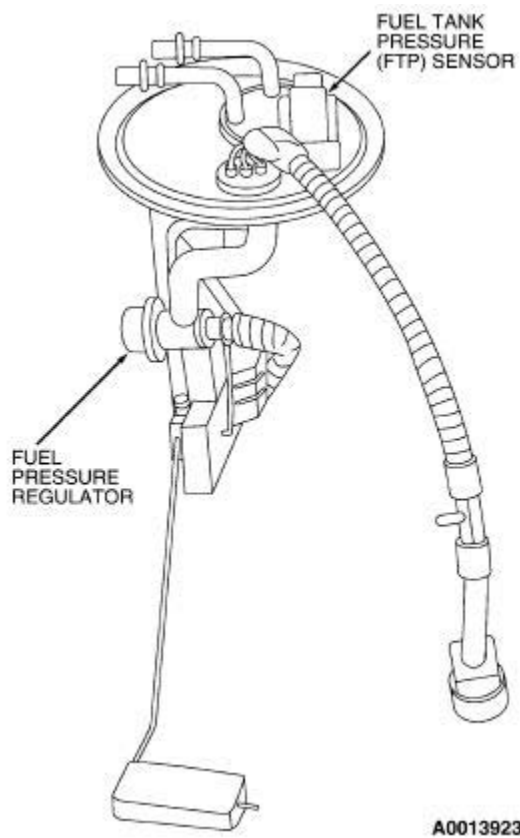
Mechanical Returnless Fuel Pump Module (FPM)
